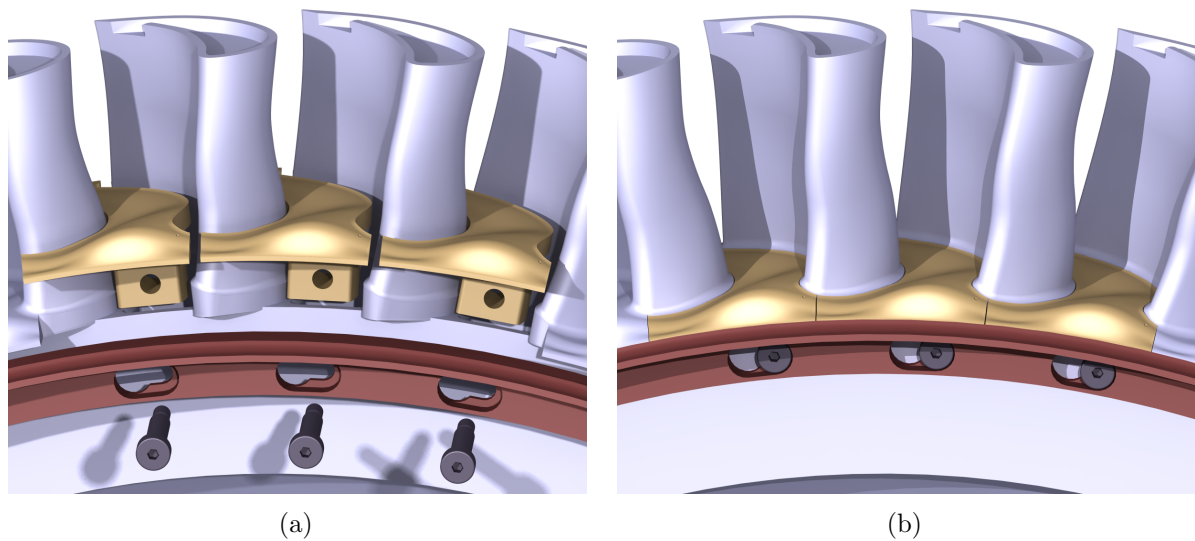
Illustration of the hub heat transfer platform integration into the rotor blisk. Exposed view (a) and assembled view (b).
